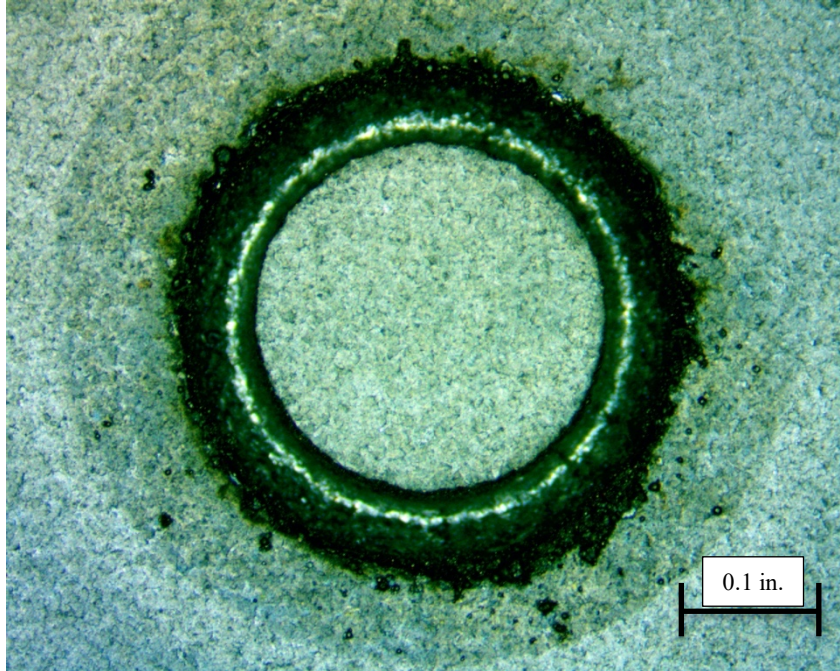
Task 1.1 Cut 3 with a Cut Depth of 0.05 in., an Electrode Diameter of 0.33 in., and a Fastener Material of Inconel
